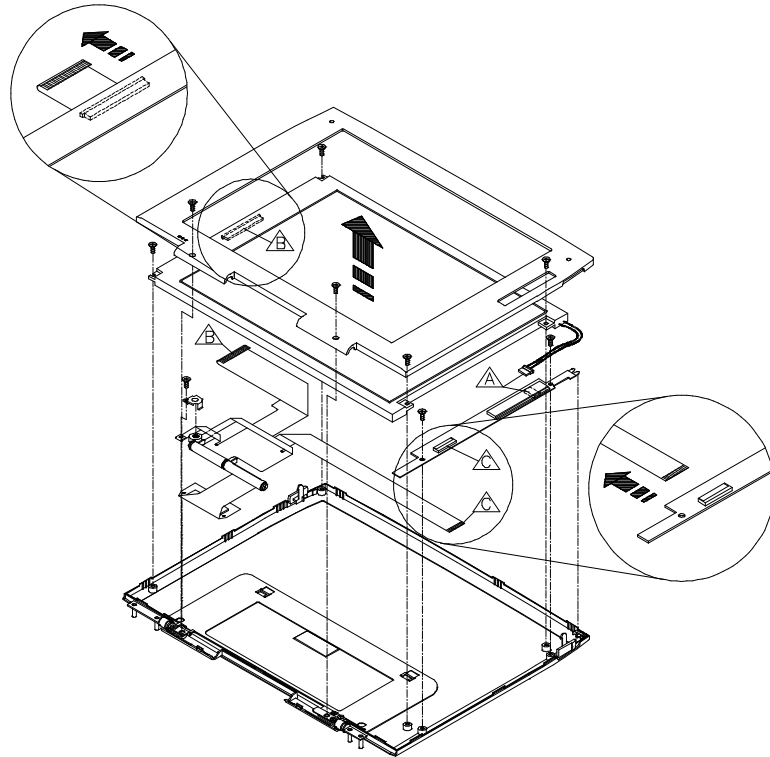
Removing the LCD Panel and Status/Inverter Board
